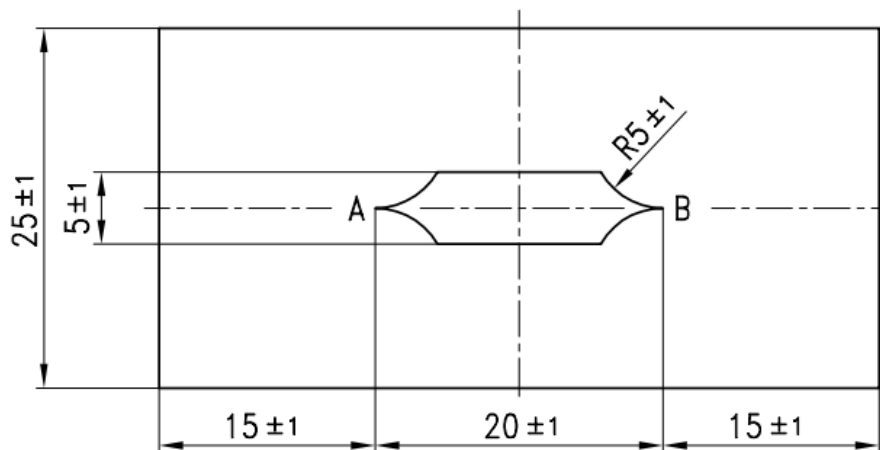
Test piece for double edge tear (all dimensions in millimeters  $\pm 1$ mm, R=radius)
